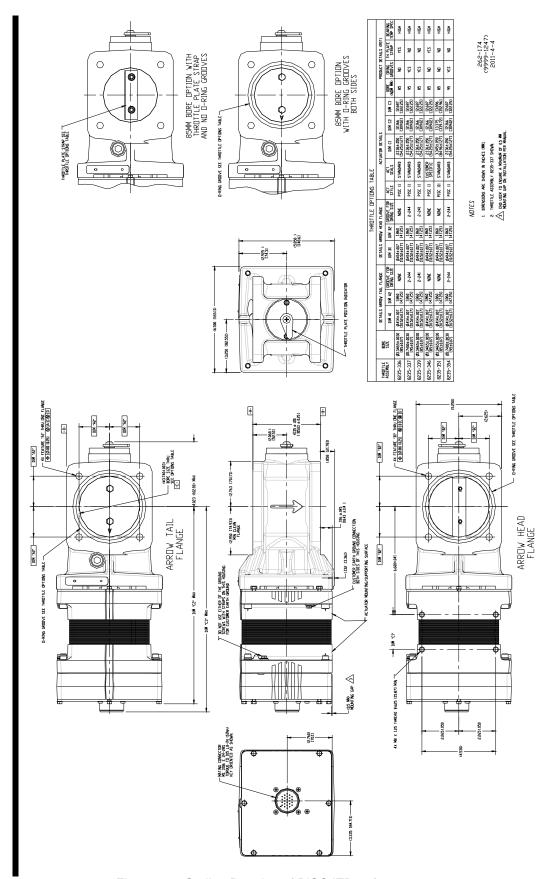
Outline Drawing of PISC ITB 85/95 mm
